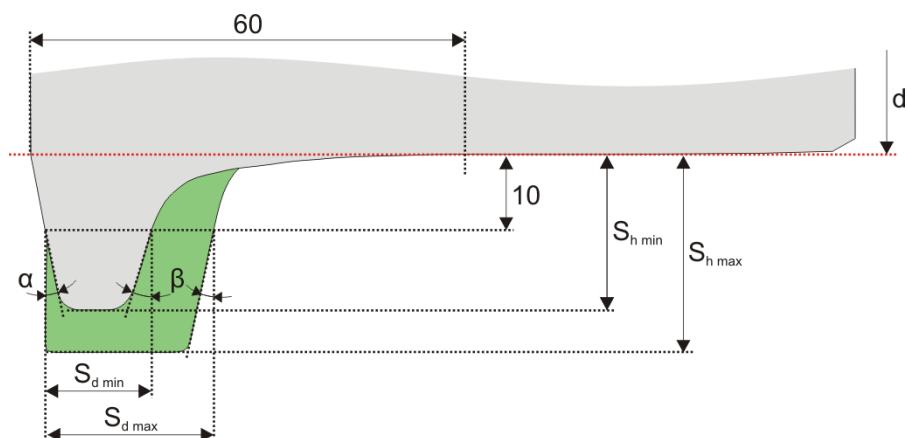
Overview of the wheel flange dimensions (light rail), measurements in mm
